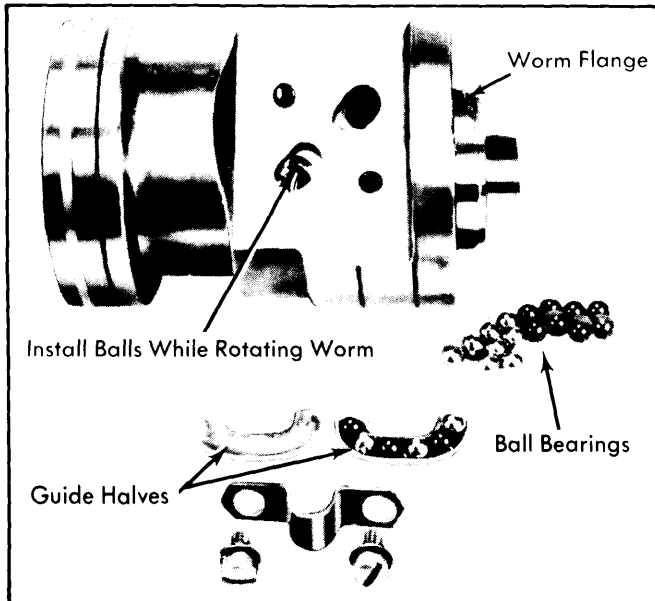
Installing Ball Bearing into Rack-Piston Assembly
